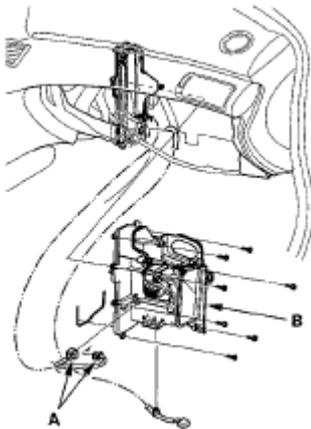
Identifying Connectors, Power Transistor, Control Motor Relay And Joint Duct
